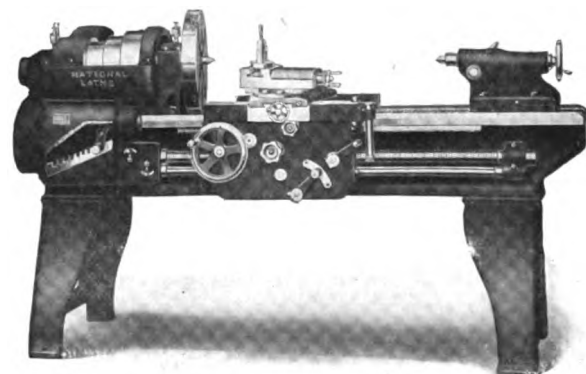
14-In. Q. C., Double Back Geared, Cone Pulley Lathe
